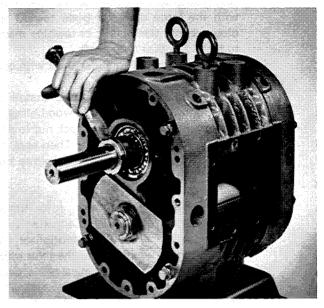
TIGHTENING LOCK NUT TO CHECK DRIVE END CLEARANCE
